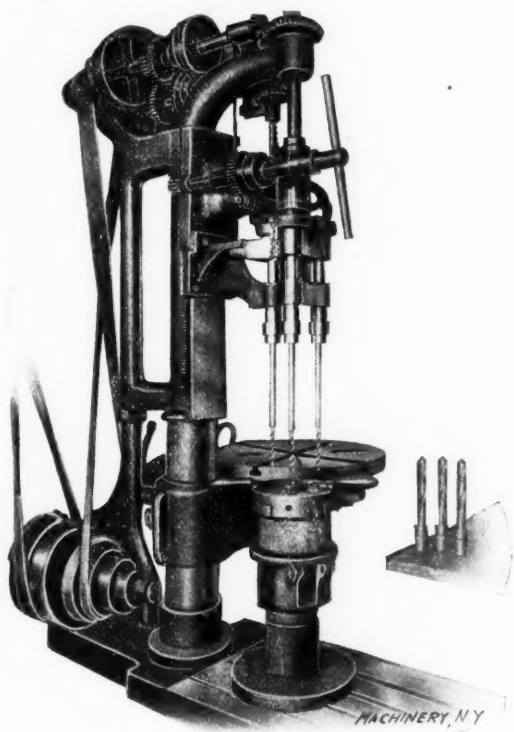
Drill Press with Three-spindle Drilling Attachment.
